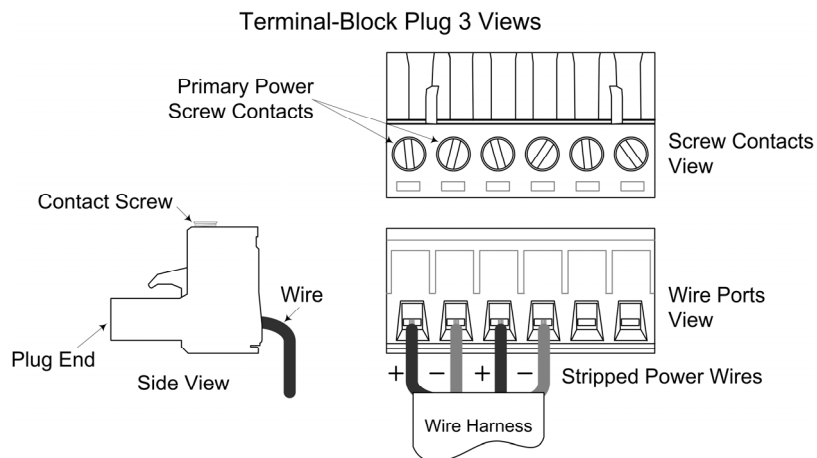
Six-Contact-Terminal-Block Plug (Primary/Redundant Power Wiring)
